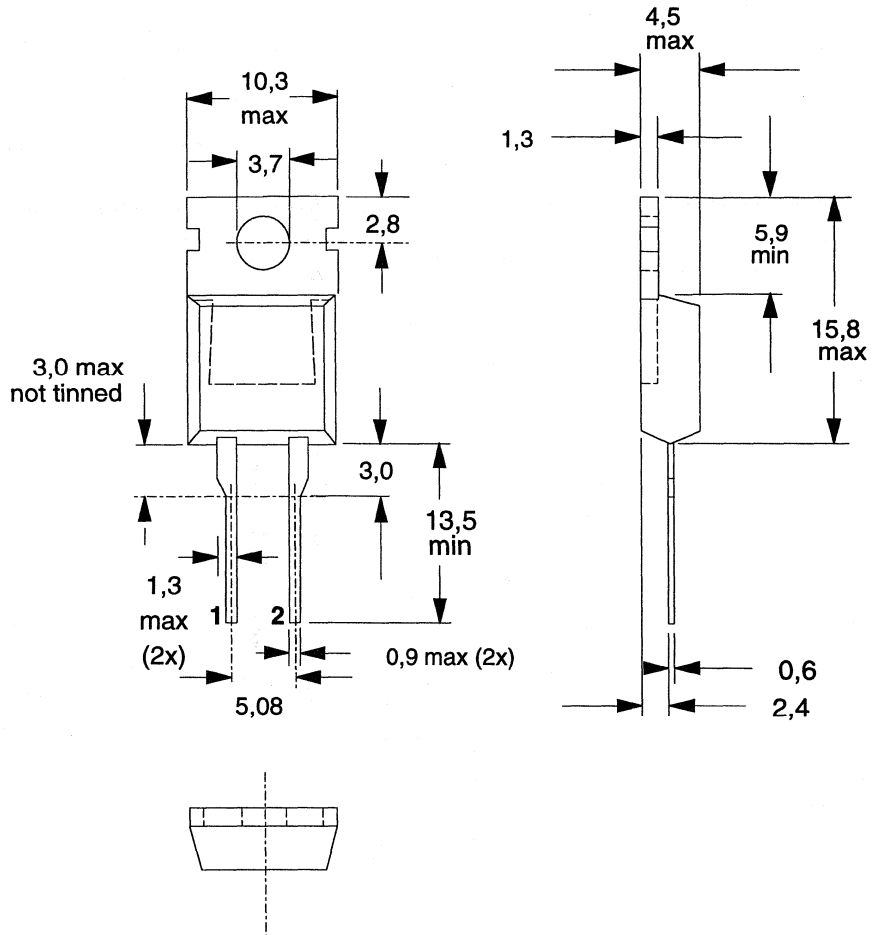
TO220AC; Pin 1 connected to mounting base.
